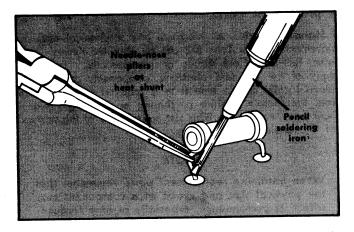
Apply soldering iron to the heat-shunted lead when removing a component from an etched-wiring board.
